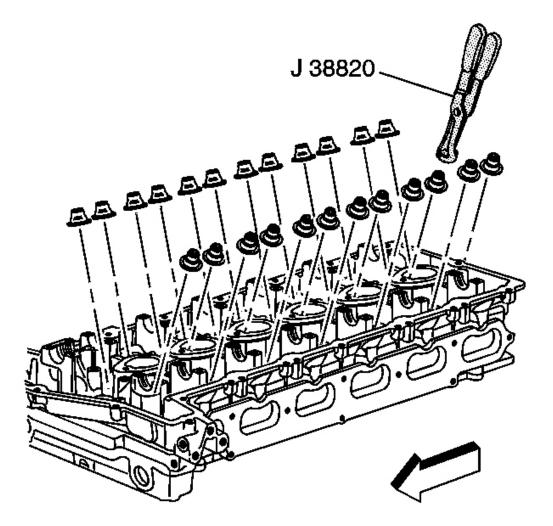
View Of J 38820 & Valve Seals Courtesy of GENERAL MOTORS CORP.
